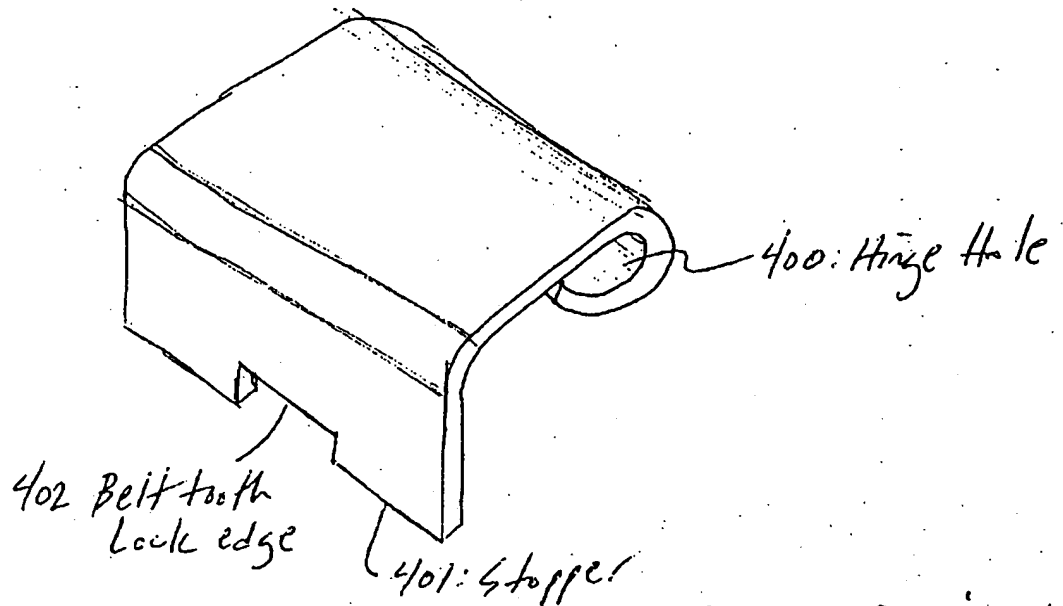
Alternate Embodiment of Locking Device: Pivoting tooth
